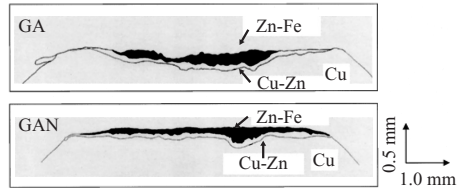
Cross section of electrode after consecutive spot welding test (2 500 times)
